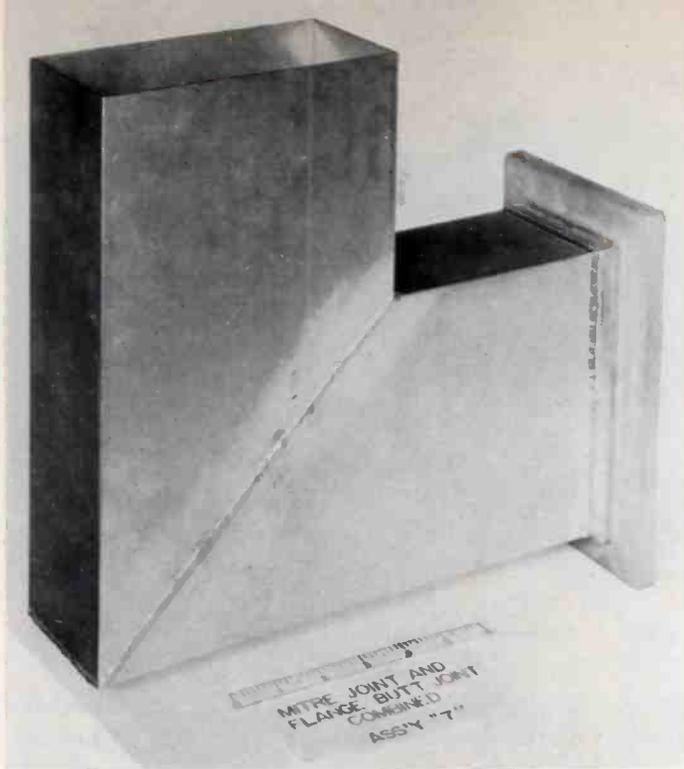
Flange rear extension about .080 in. thick; butt welded.
